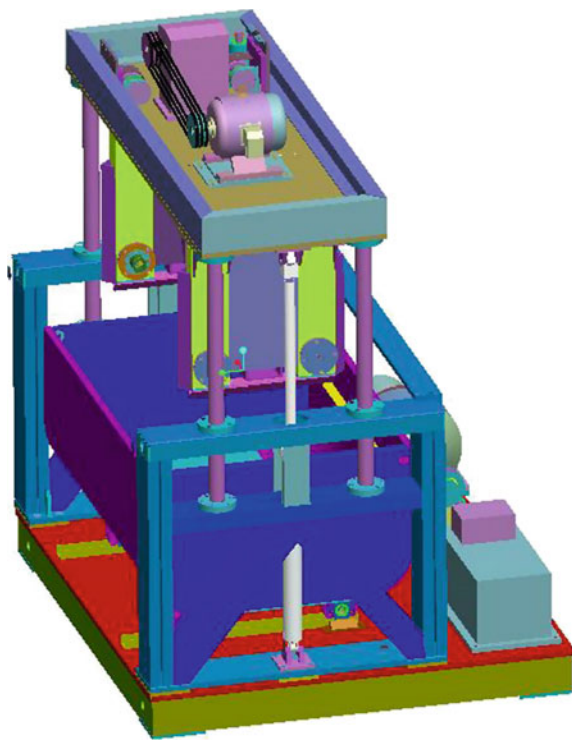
Assembly drawing of horizontal spindle finishing equipment
